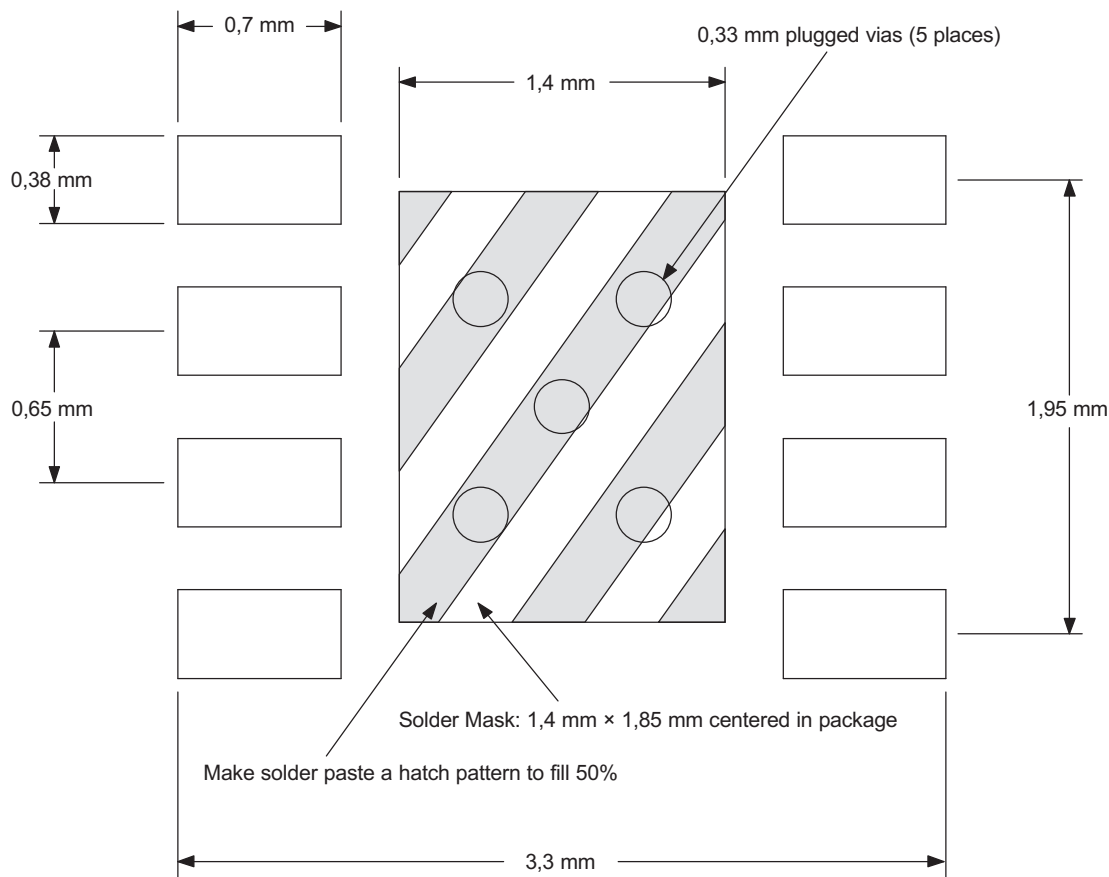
TPA2005D1-Q1 8-Pin QFN (DRB) Board Layout (Top View)
